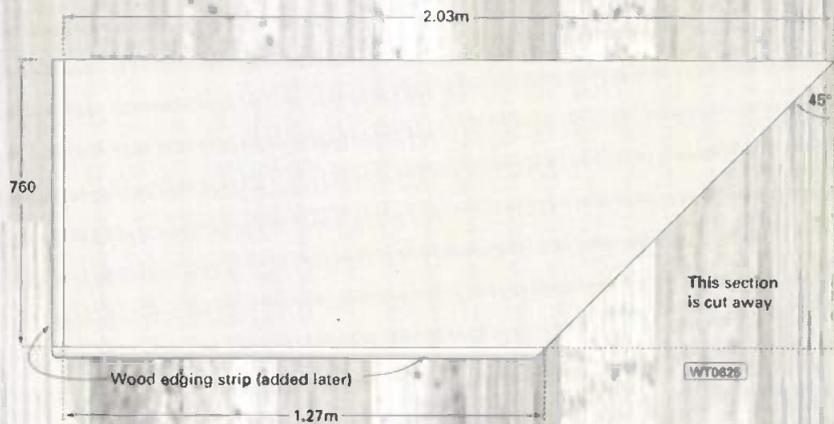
The layout of the top sections (two similar pieces have to be made).
